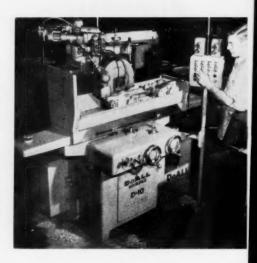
Standard DoAll D-10 surface grinder equipped with "automatic downfeed" for grinding radii on rectangular pump vanes.
